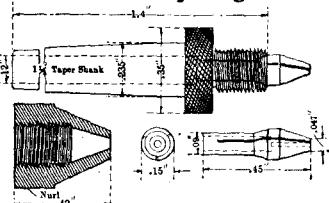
SMALL DRILL CHUCK book. But you will see how precision drilling techniques were devised for the production of early adding machines, type-
